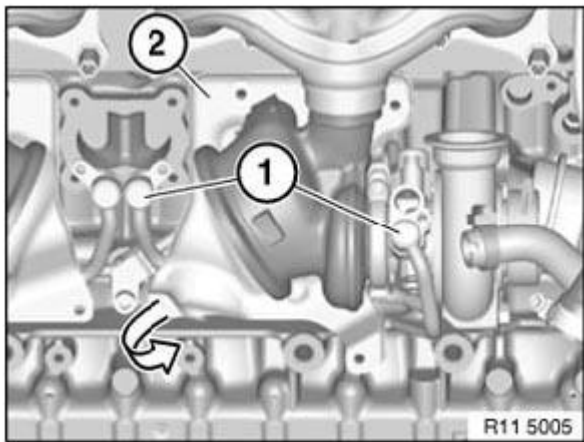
Identifying Heat Shield And Coolant Feed Line
